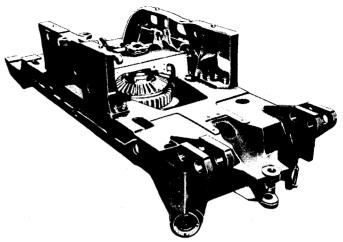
Top view of Revolving Frame with Machinery Side Frames bolted in position and also showing the Swing Shaft Bevel Gearing.
